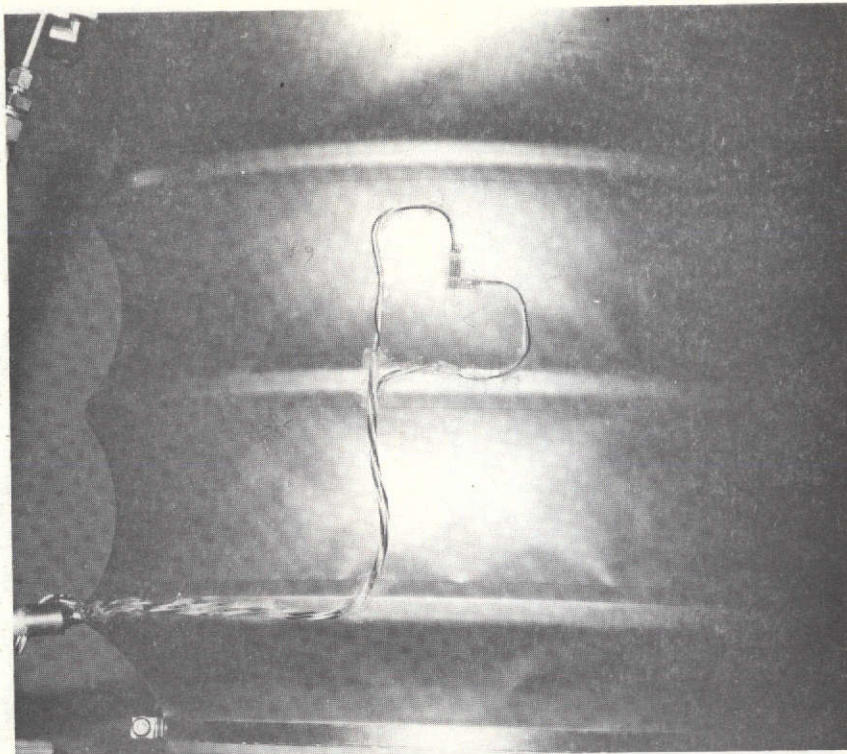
Assembly #2, 381 mm (15 in.) Hg Vacuum Pressure
